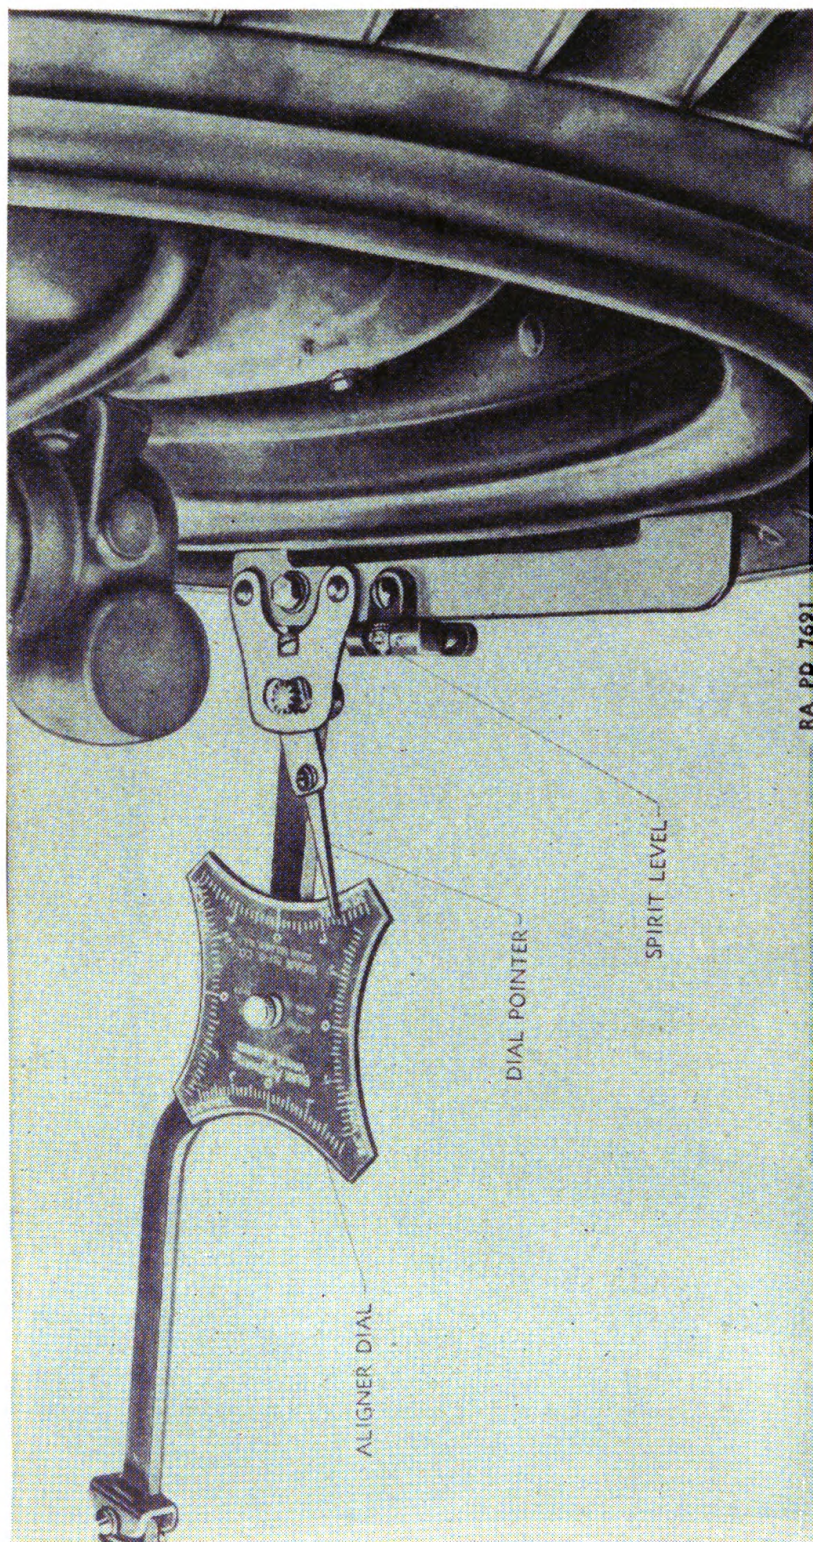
Scale reading showing  $1\frac{3}{8}$  inches exaggerated toe-in.
